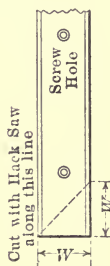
METHOD OF LAYING OUT A MITER CUT.
